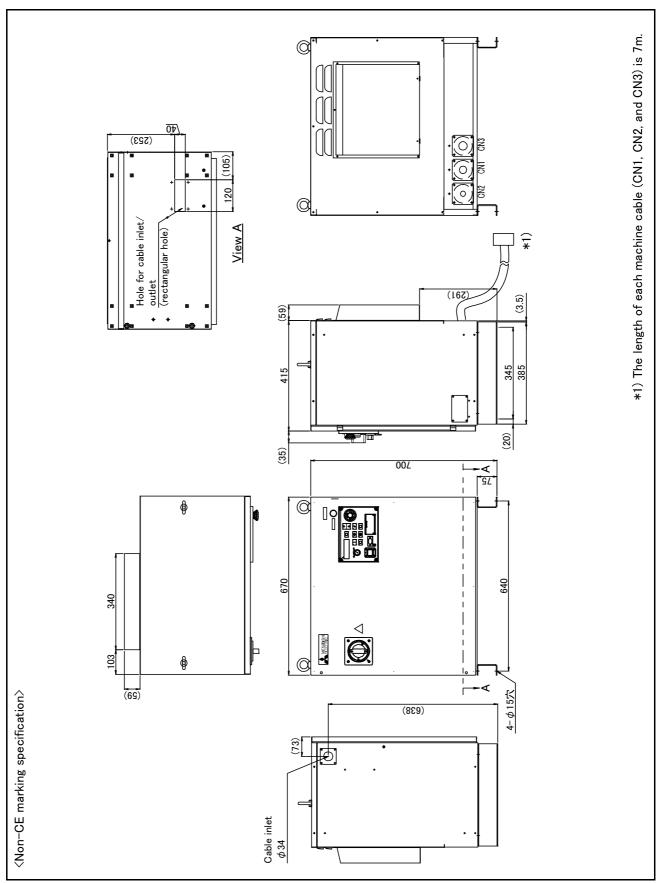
Outside dimensions of controller (CR760 non-CE marking)
